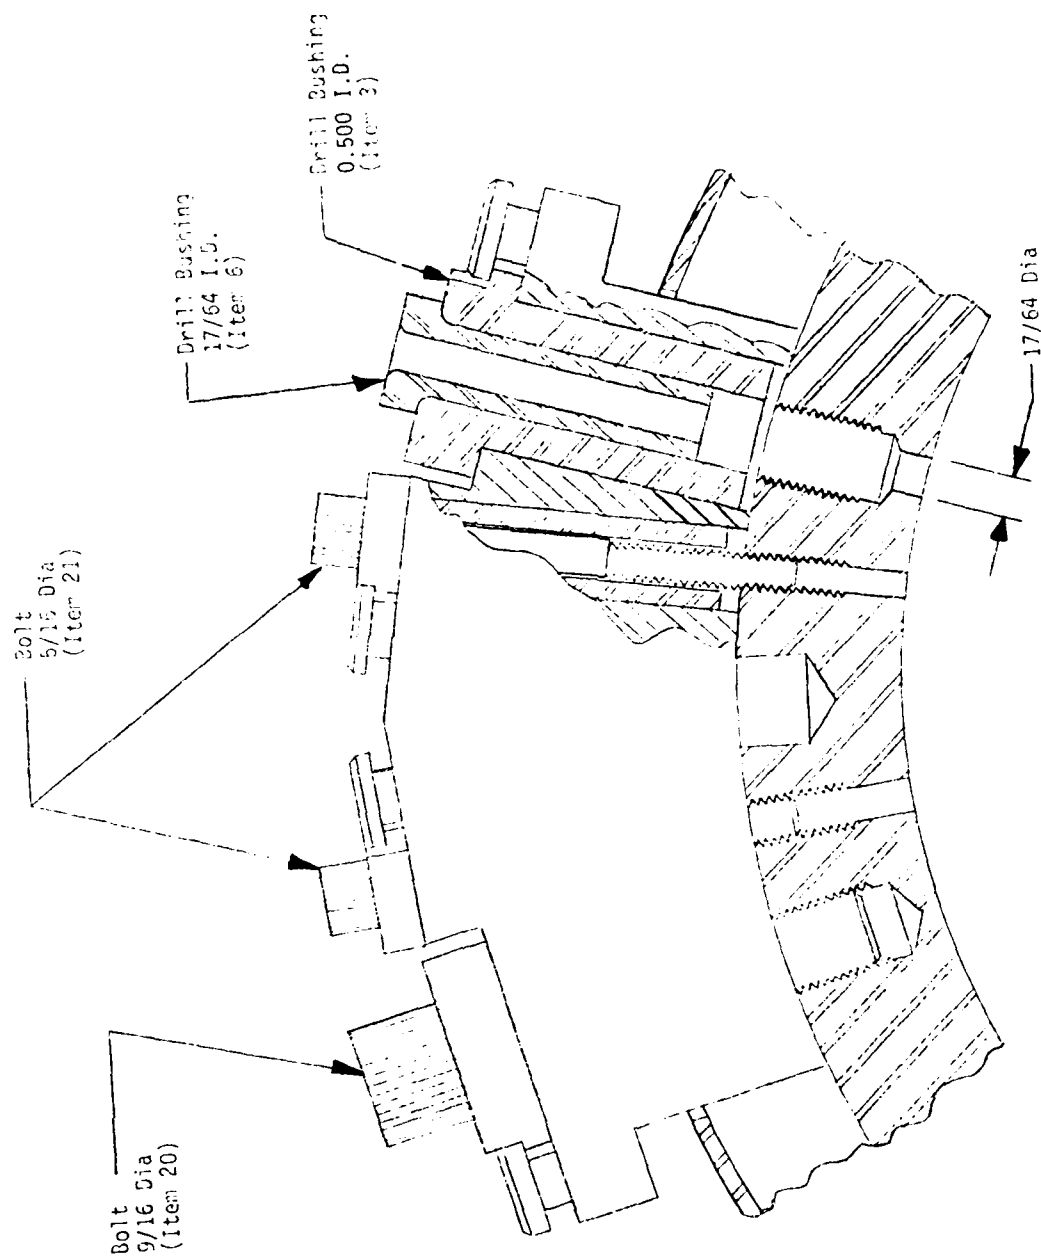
Keensert installation: Drill fixture in place with two bolts and pilot hole drilled in wing mounting hole.
